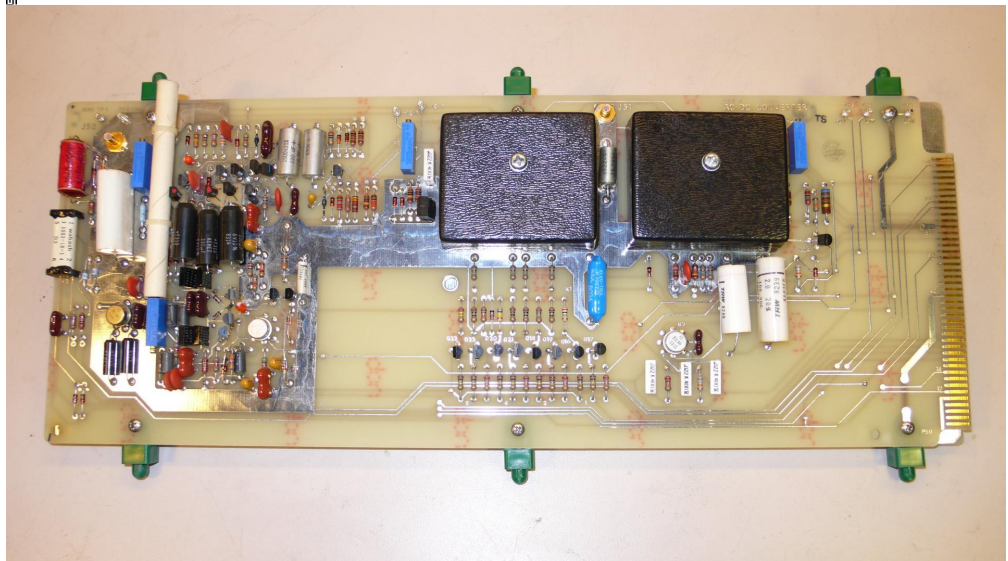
AC-DC Converter PCB Assembly (cont)
